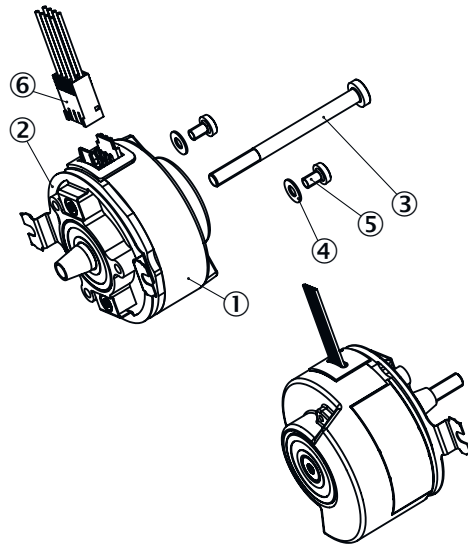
Motor feedback system with Tapered Shaft and Spring Mounting Support
